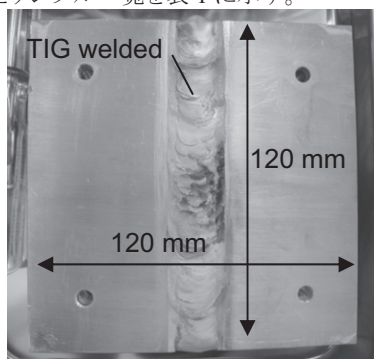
Picture of a welded test specimen. Two aluminum plates were TIG welded.
